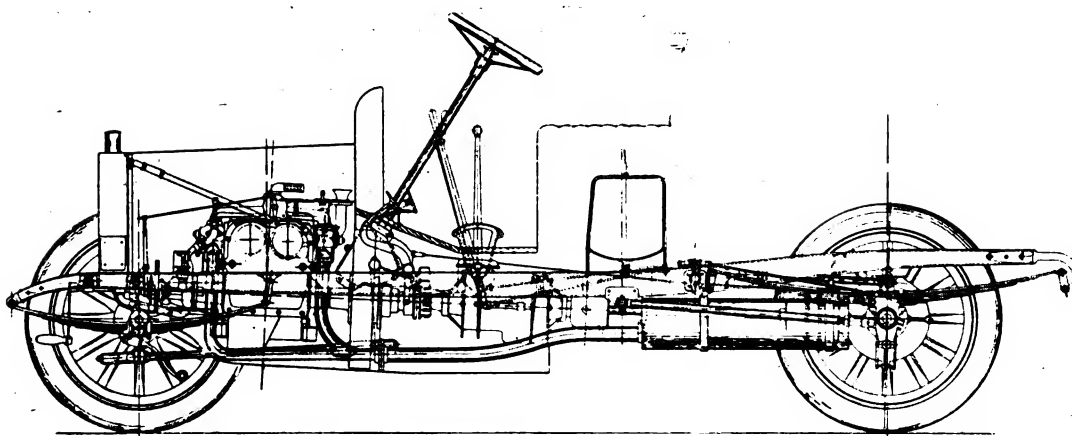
Side Elevation of the 12-15-h.p. Arrol-Johnston Chassis.
